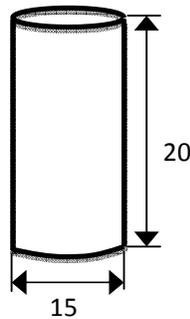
Hardness Test Specimen (All dimensions in mm)
